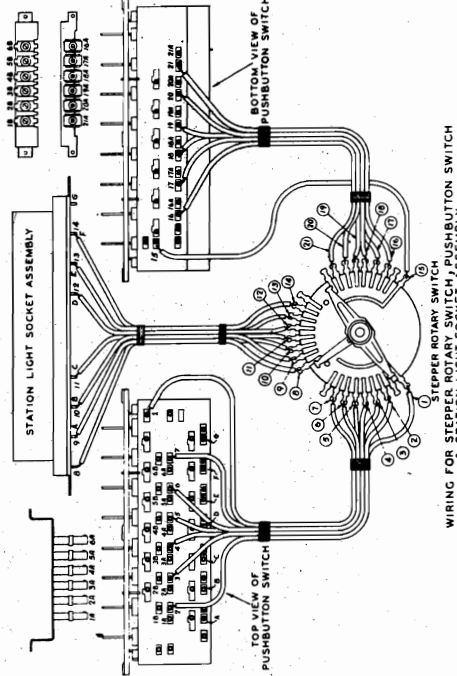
CABLE WIRING FROM STEPPER ROTARY SWITCH TO PUSH-BUTTON SWITCH AND STATION LIGHTS.
